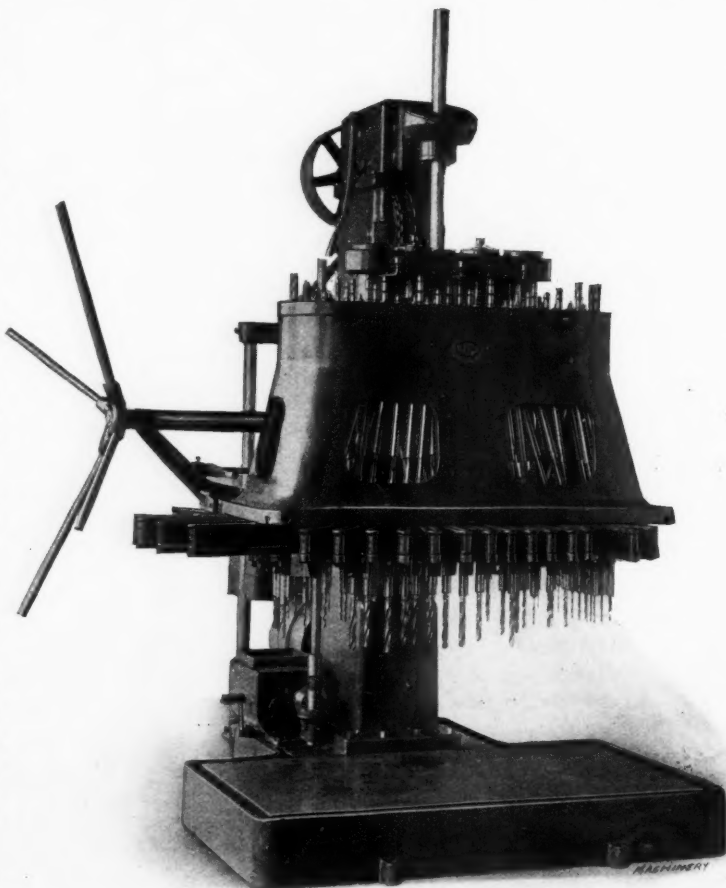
Front View of "Natco" No. 30 Multiple Spindle Drill
